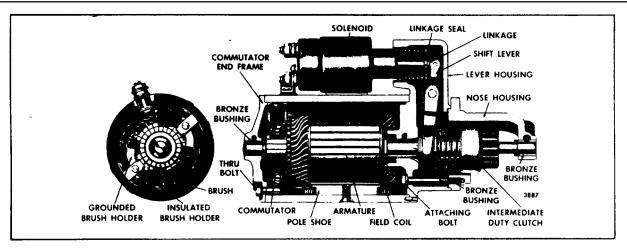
Cross-sectional View of Motor with Sprag Intermediate Duty Clutch
